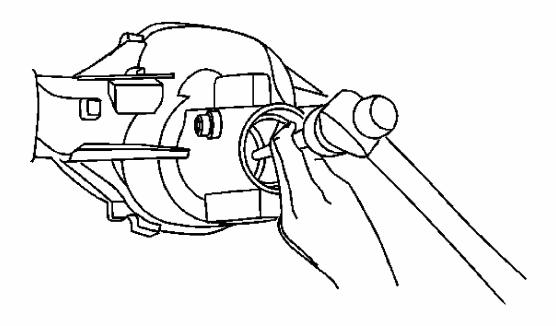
View Of Inner Pinion Bearing Cup Courtesy of GENERAL MOTORS CORP.
